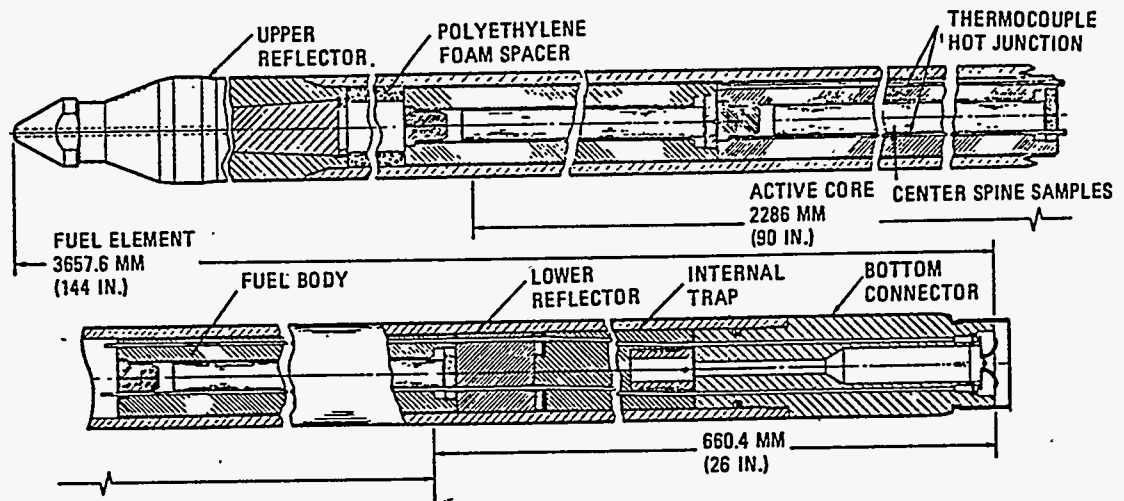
Typical Peach Bottom Test Element Axial Layout
